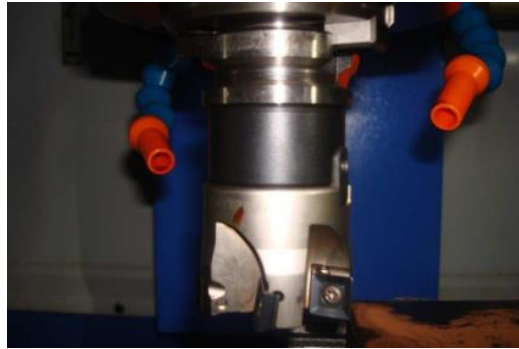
(a): Tool holder F90SD D50 ,22,12
